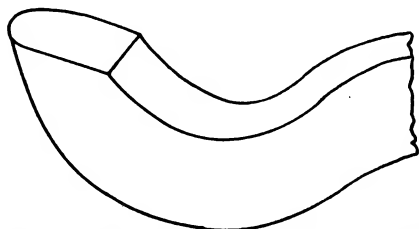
THE CUTTING END OF THE TOOL IS ROUND
